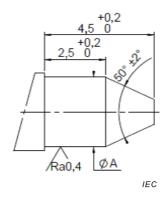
Gauge pin for socket-centre contact (for dimensions, see Table 3)
